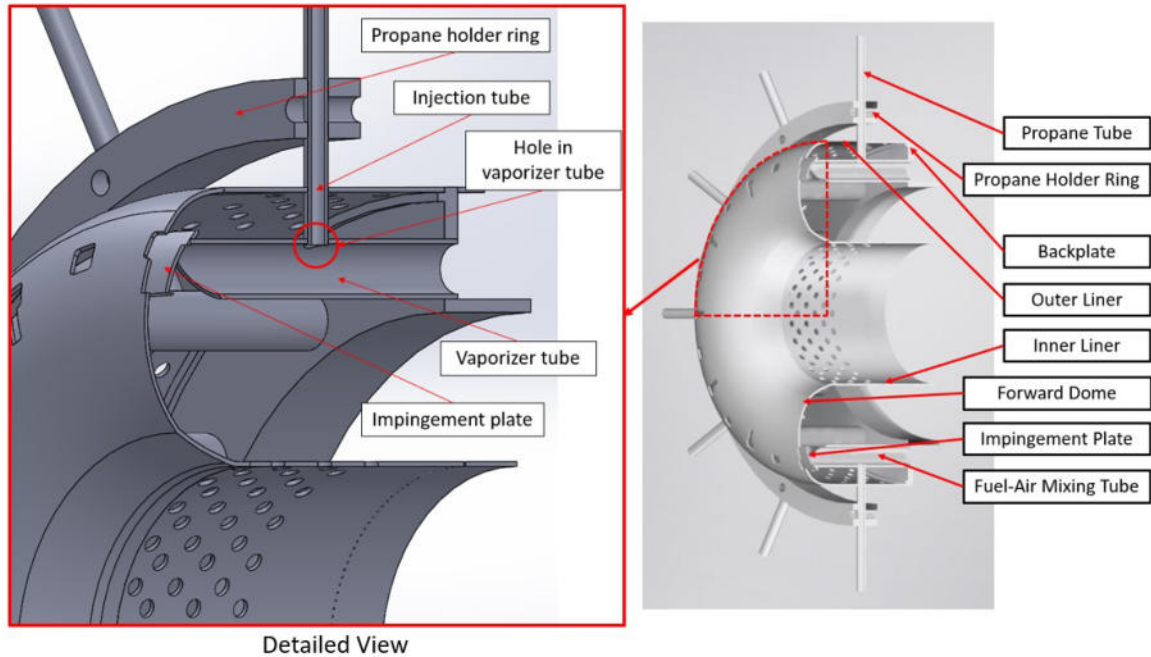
Cross-sectional view of the compact combustor used for the JetCat P90 engine
